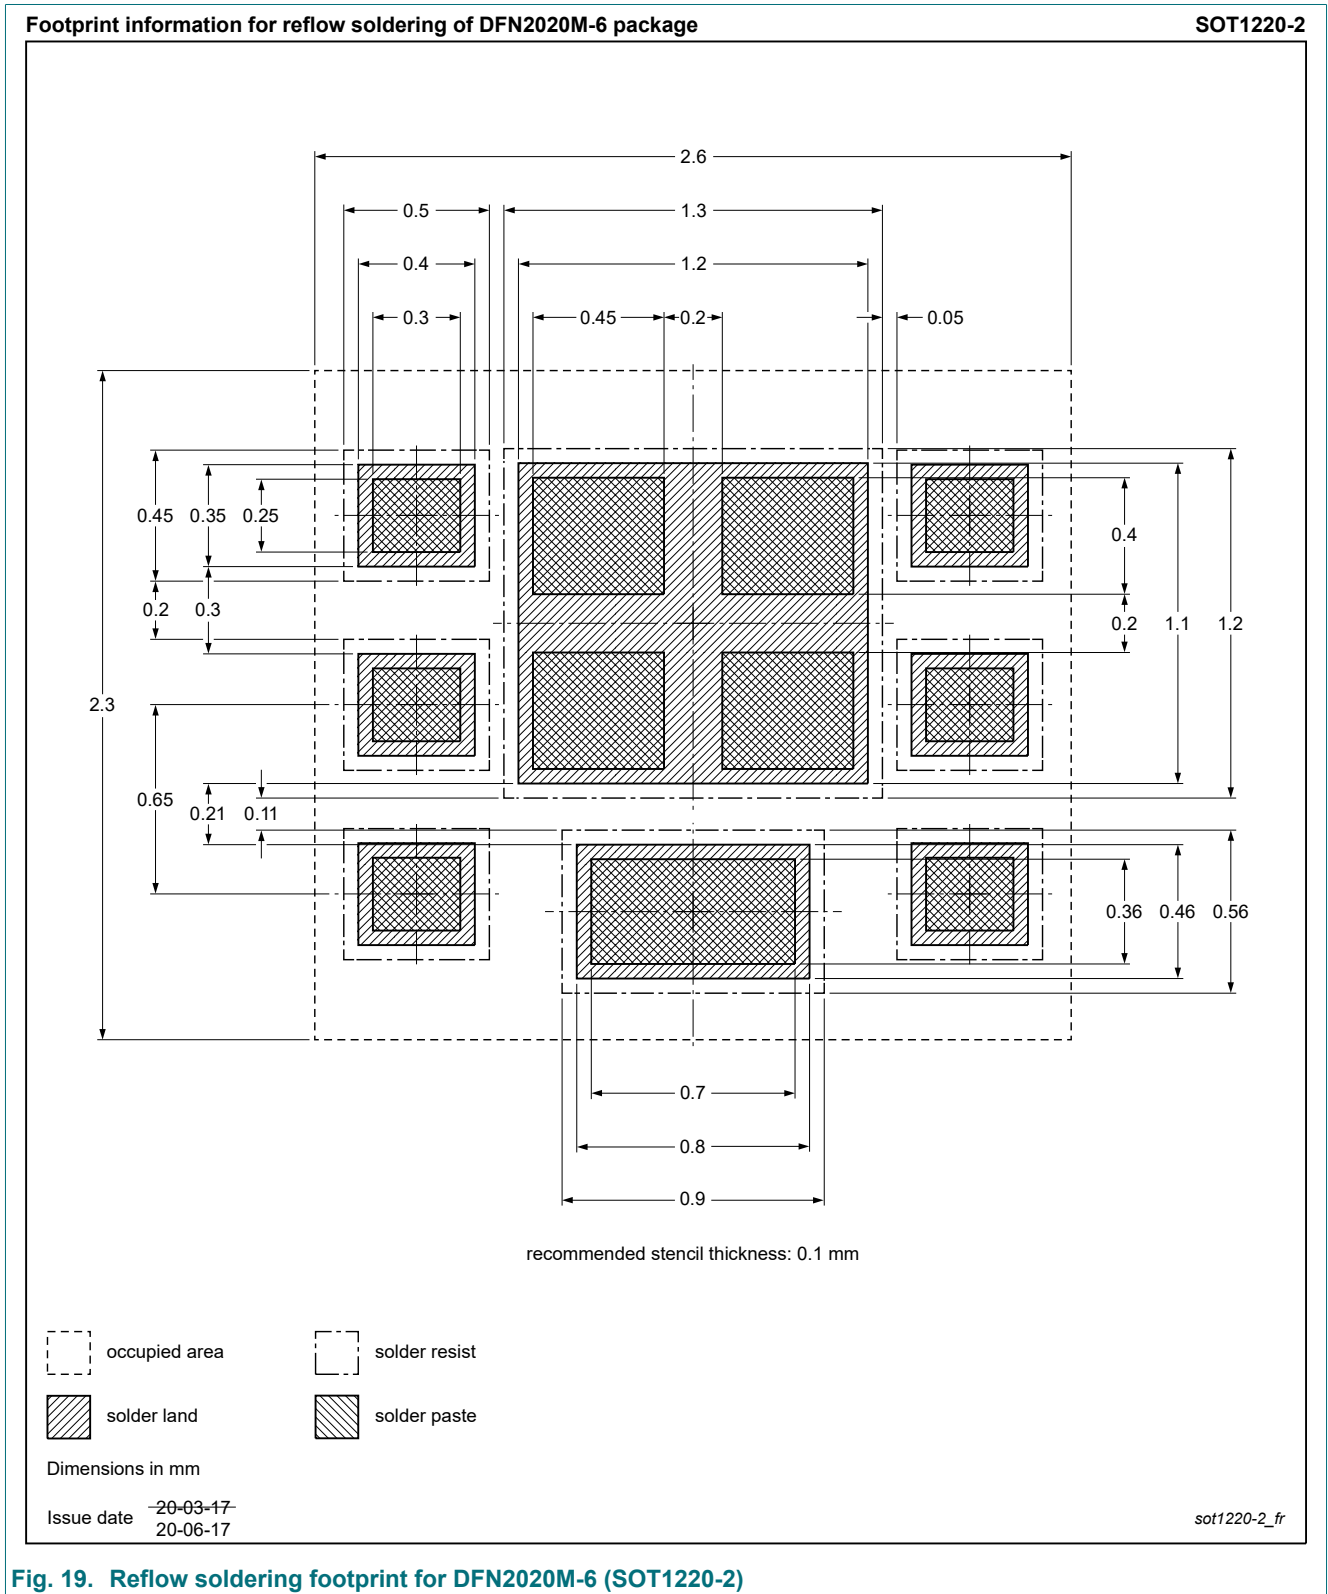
Reflow soldering footprint for DFN2020M-6 (SOT1220-2)
